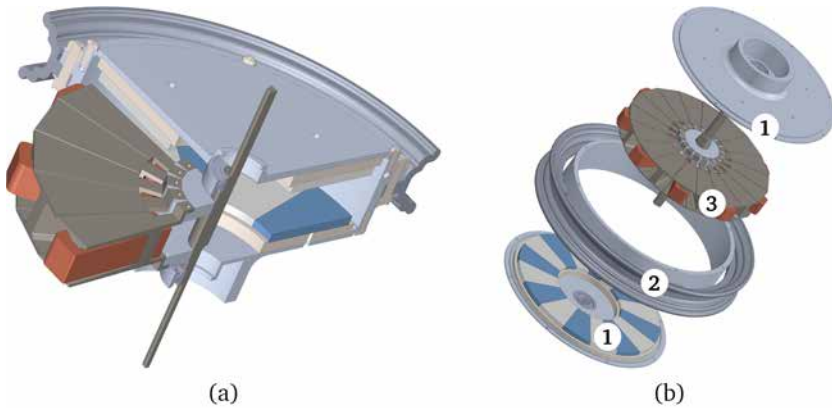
Mechanical assembly of SAT PMBLDC in-wheel motor. (a) Section view. (b) Exploded view of sub-assemblies (1. End cover and rotor poles, 2. wheel rim and spacer, and 3. stator).
